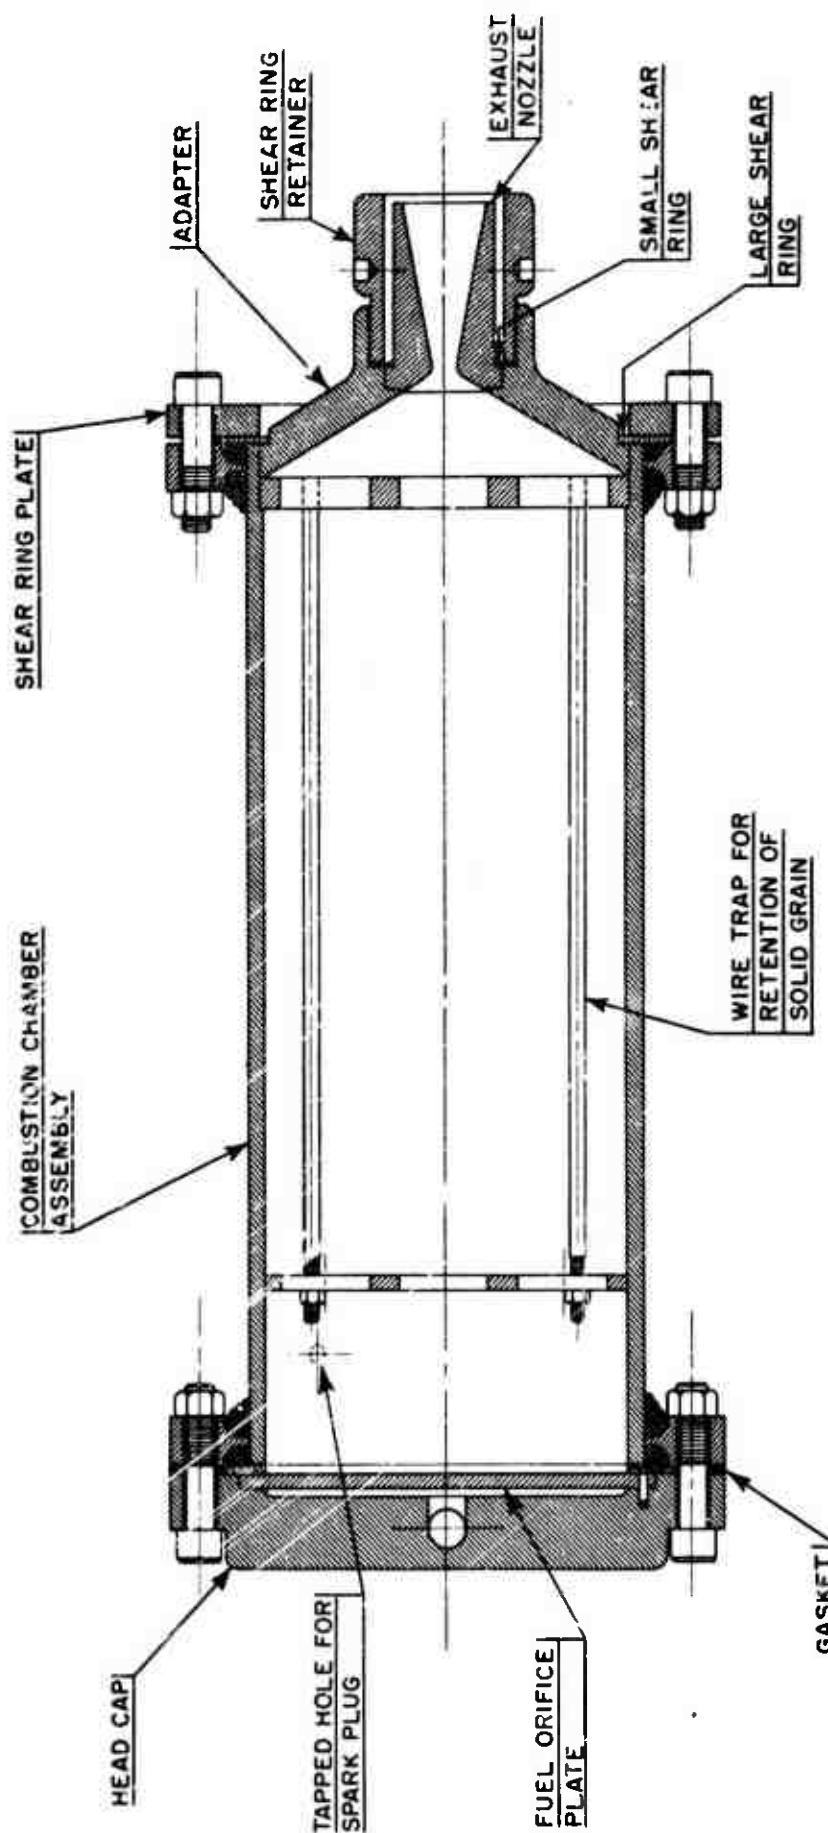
LONGITUDINAL CROSS-SECTION DRAWING OF 6-INCH I.D. THRUST CHAMBER ASSEMBLY
